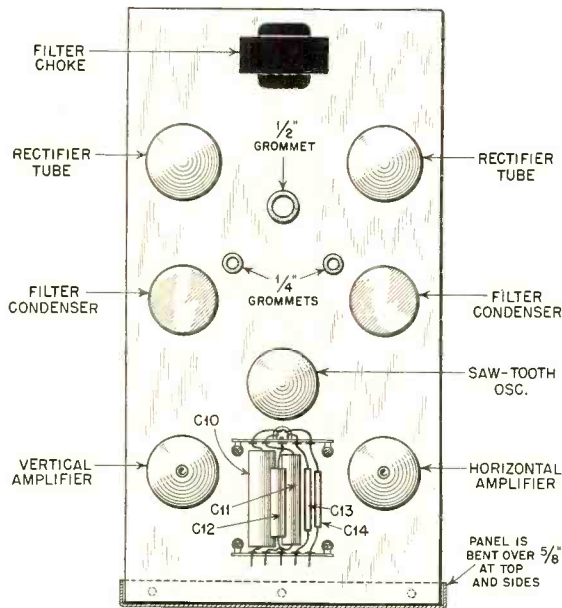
Chassis layout for two-inch 'scope. Also adaptable for larger or smaller job by appropriate dimension changes.
